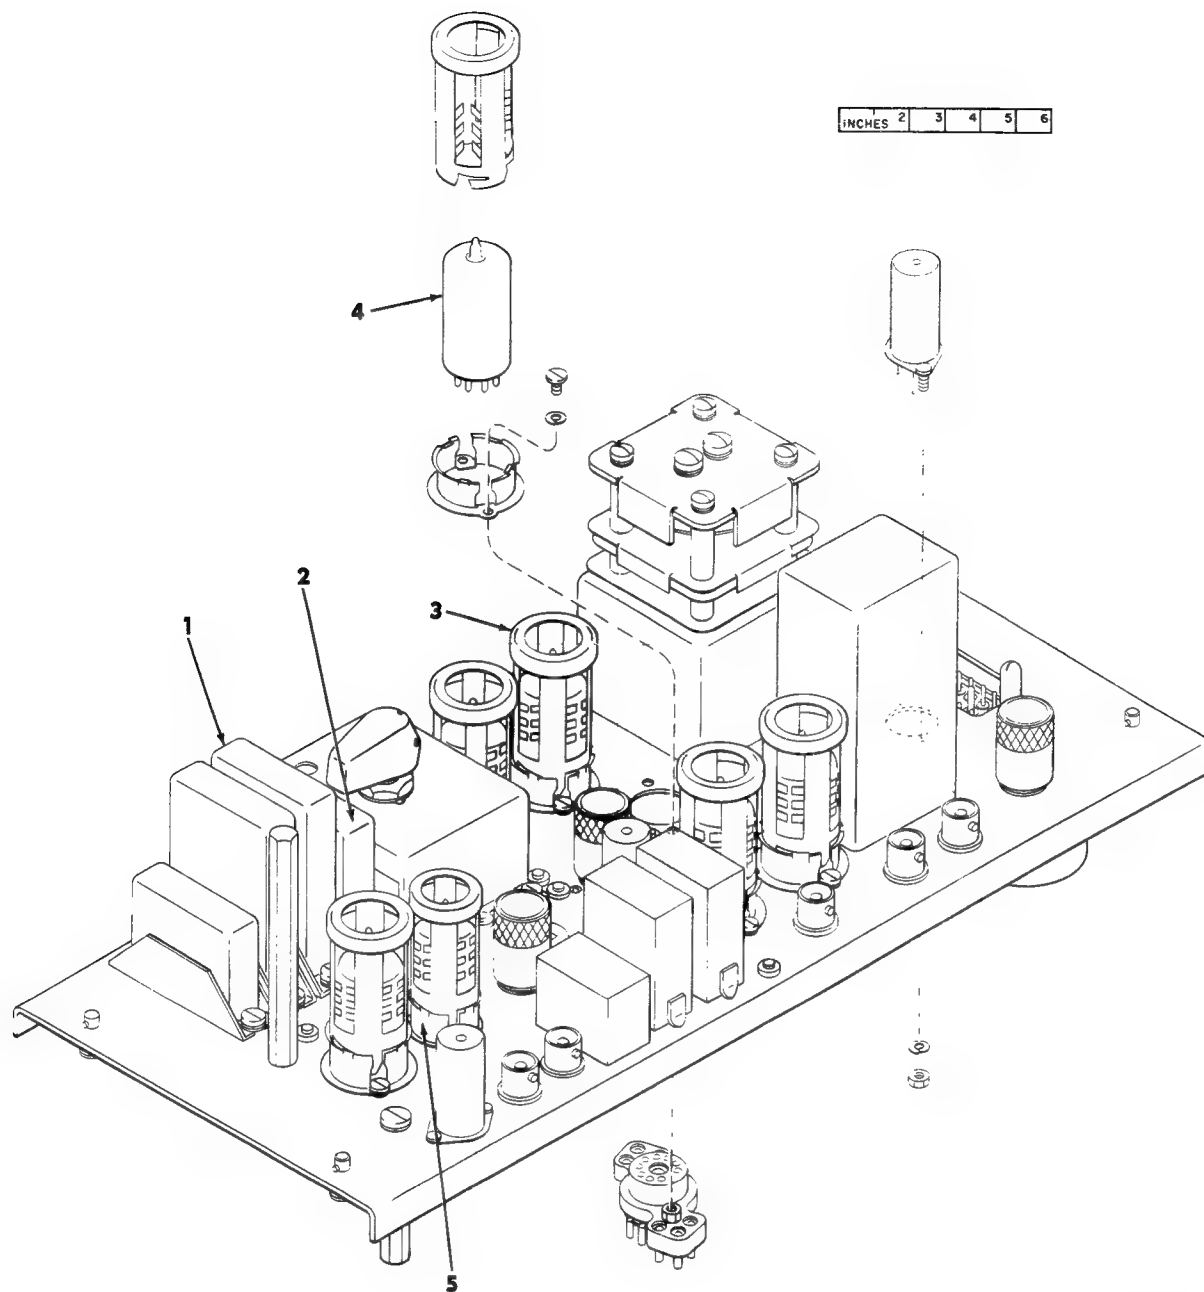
Synchronizer, electrical (9144786)—partial exploded view
